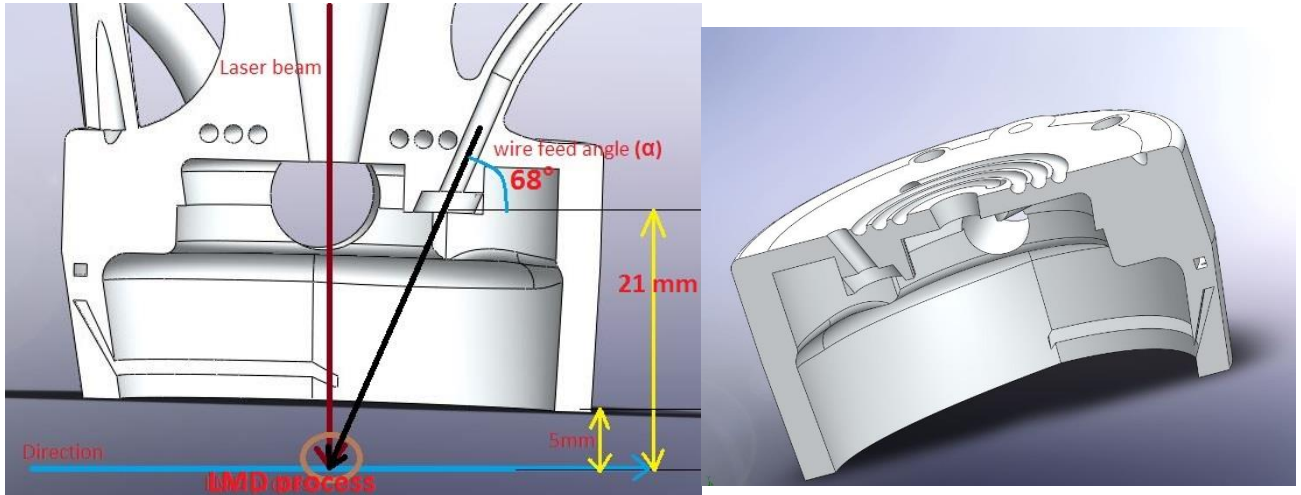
(a) Cross section view of wire feeding position (left) and (b) cooling tubes (right).
